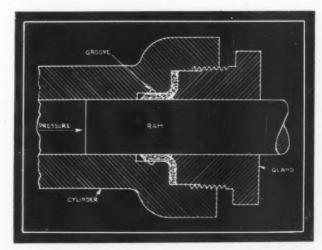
A grooved recess is often provided in addition to fillets when flange leather packings are employed
